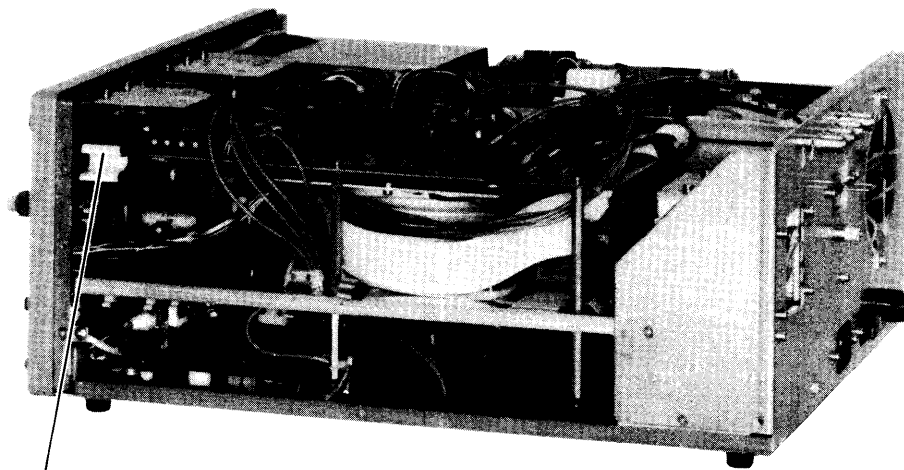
(8). Printed circuit board replacement I (Top I)
